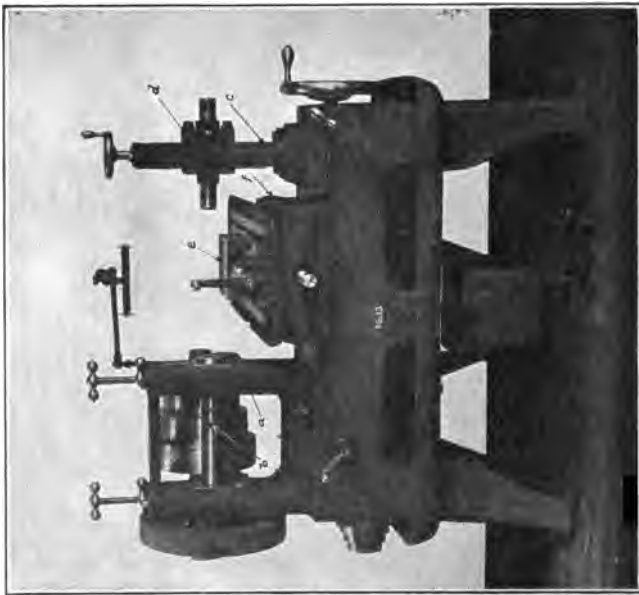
LINCOLN TYPE OF MILLING MACHINE
